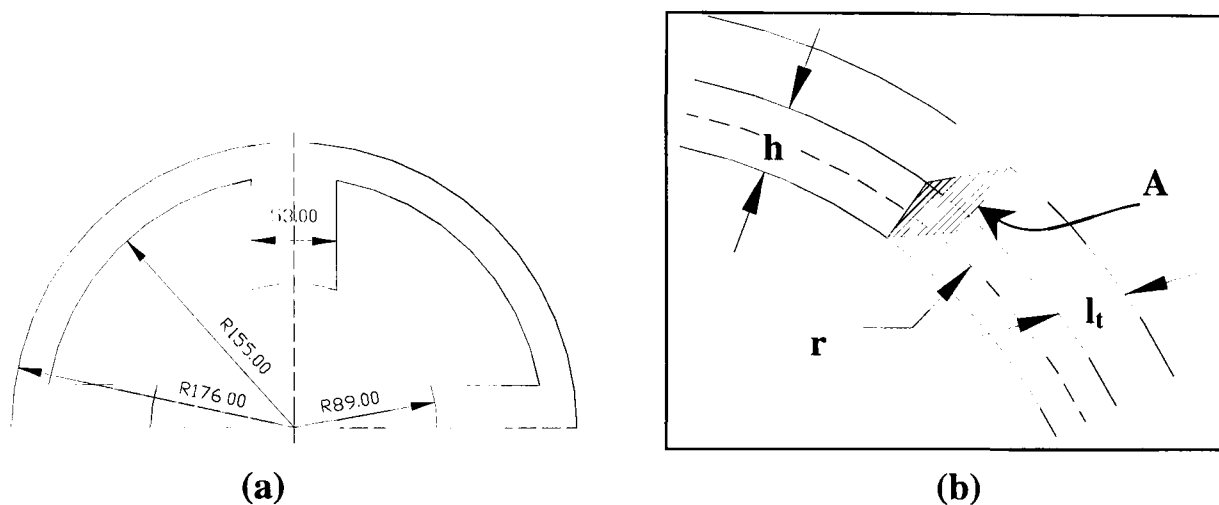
(a) Dimensions of dc machine stator [YAN78], (b) definition of variables
